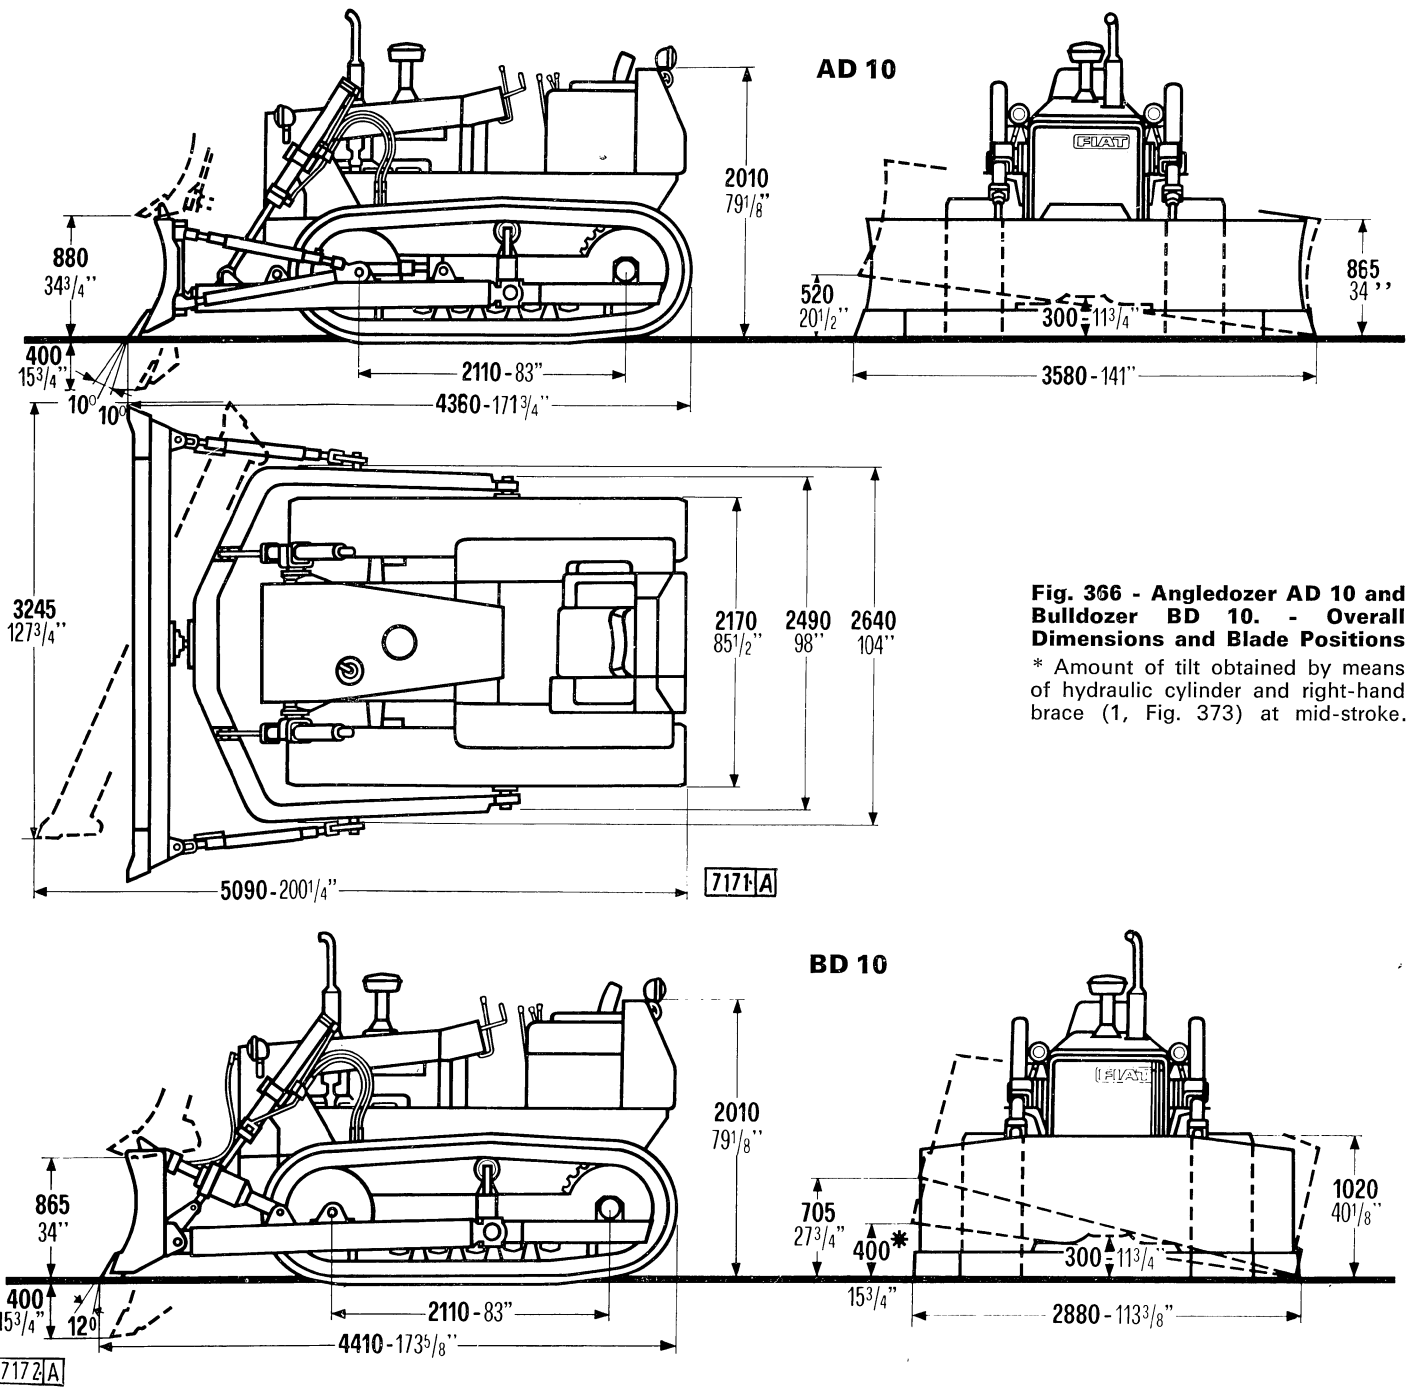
Angledozer AD 10 and Bulldozer BD 10. - Overall Dimensions and Blade Positions
